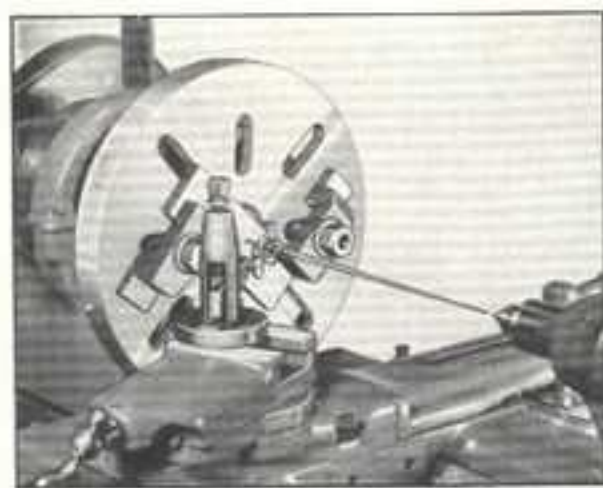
Centering Work on the Face Plate with a Center Indicator
